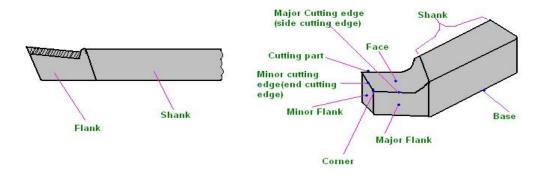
Nomenclature of a Single Point Cutting Tool
